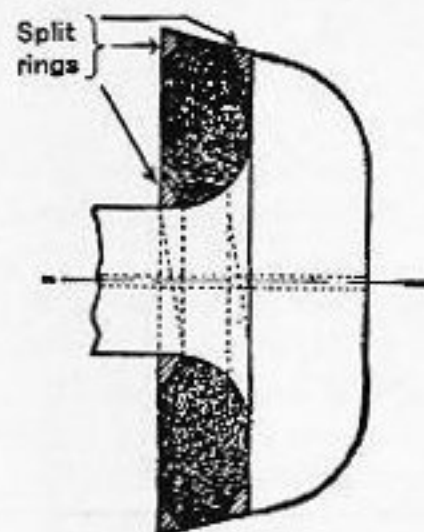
THE DE BANGE GAS CHECK—SHOWING SPLIT-RINGS.
